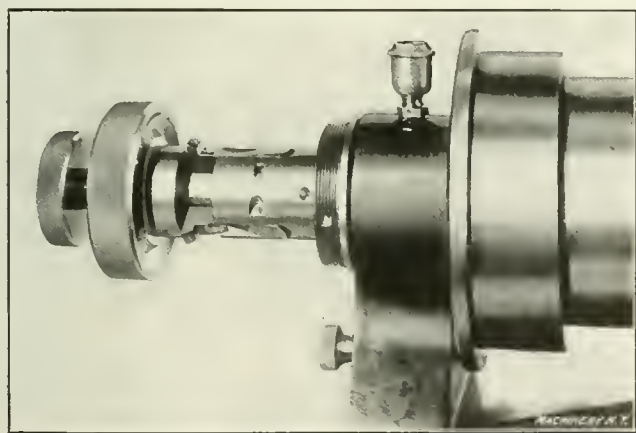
Operator Housing Removed to show Position of Fingers when Chuck is Closed
